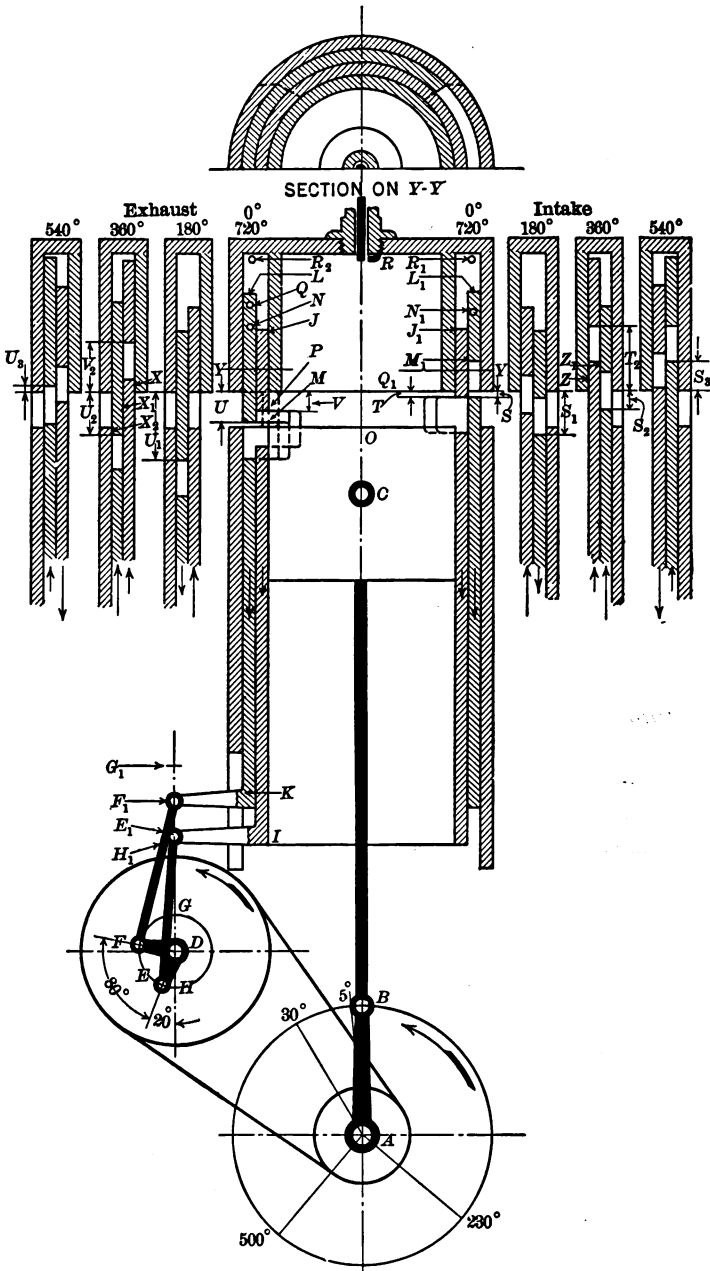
SHOWING DEAD-CENTER PHASES OF ELEMENTARY DOUBLE-SLEEVE-VALVE GASOLINE ENGINE
